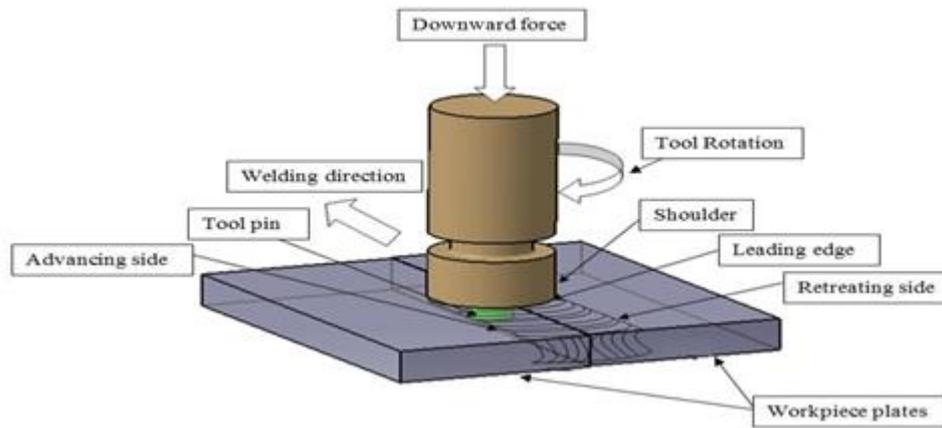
Principle of friction stir welding (Backer and Bolmsjo, 2014)
